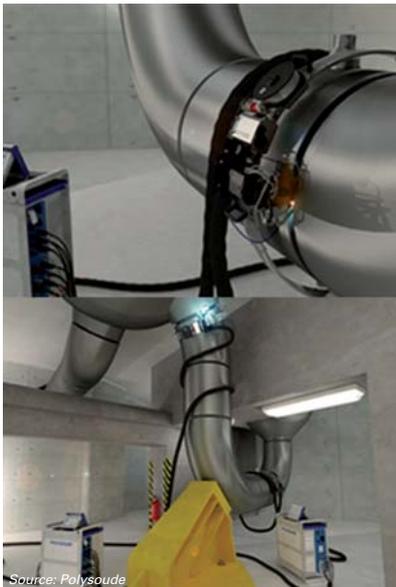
Primary coolant circuit orbital NG welding.
